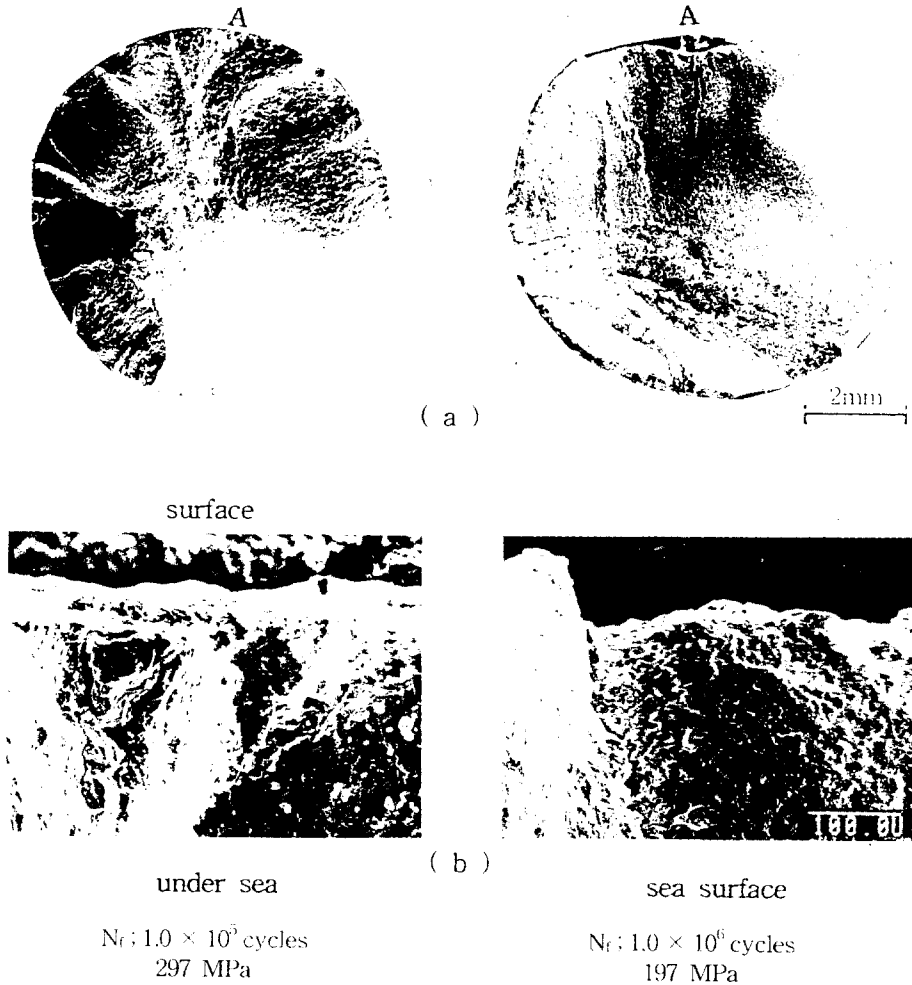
Fractography of solid shaft specimens corroded with 3% NaCl solution during 100 days
